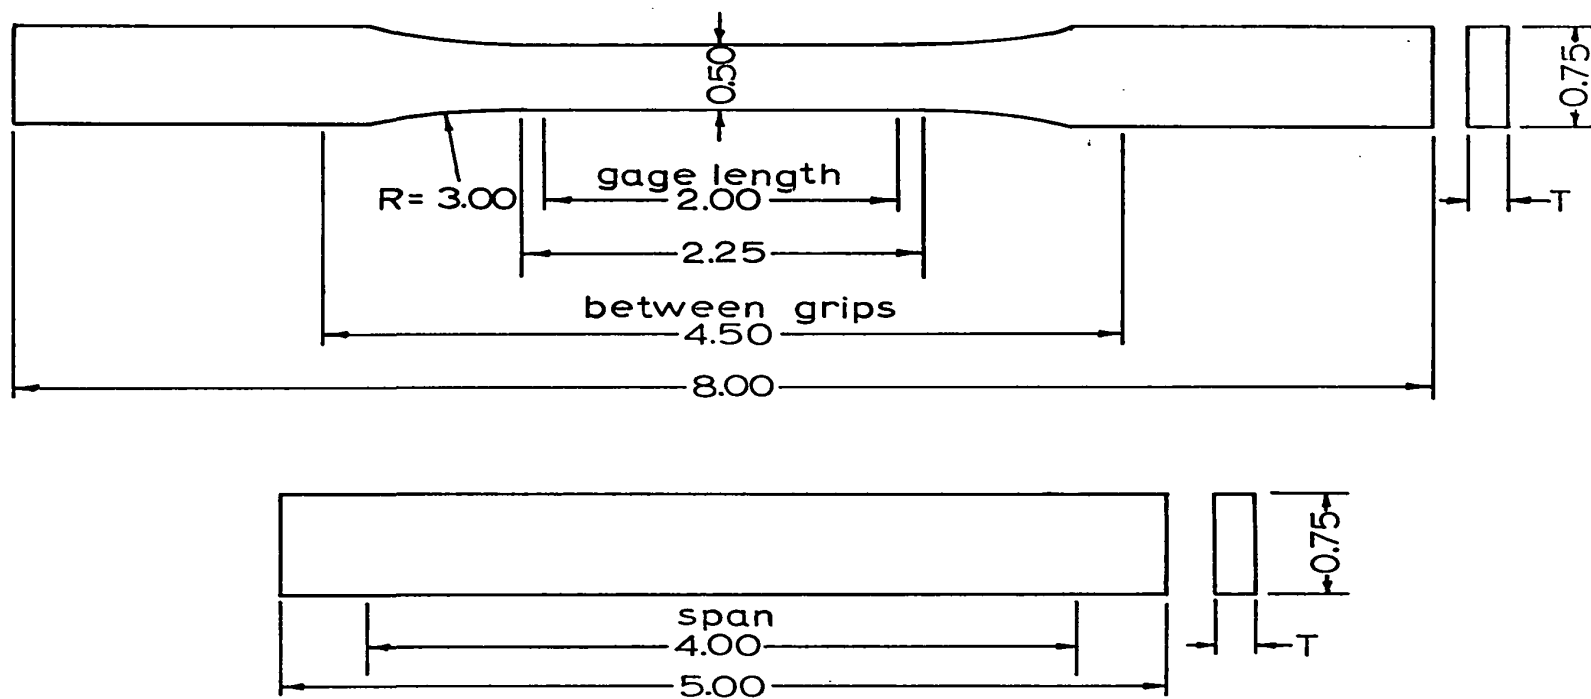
TENSION & FLEXURE SPECIMENS (F.S.)
